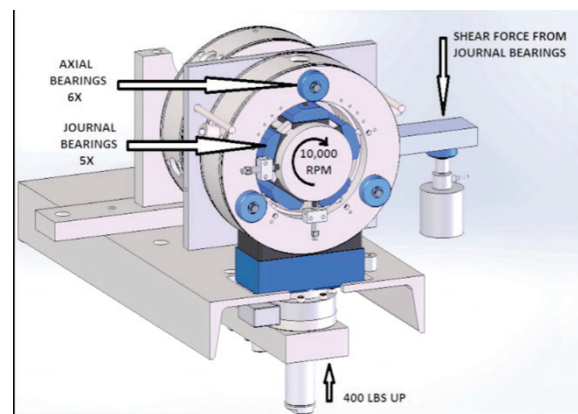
The test cartridge is constrained in 5° of freedom with 400lbs of radial load. A force gage can be used to directly measure bearing shear.
